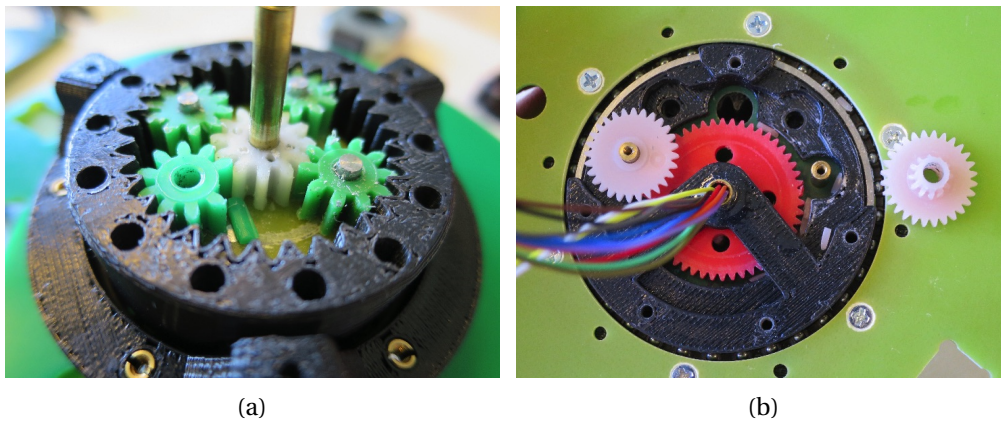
Damage to Gearbox A after failing to hold a payload equivalent to 95% of the nominal torque of the motor: (a) Broken tooth from the second planetary stage. (b) Damage to an  $n = 28 : 12$  gear from the three-stage spur gear set.
